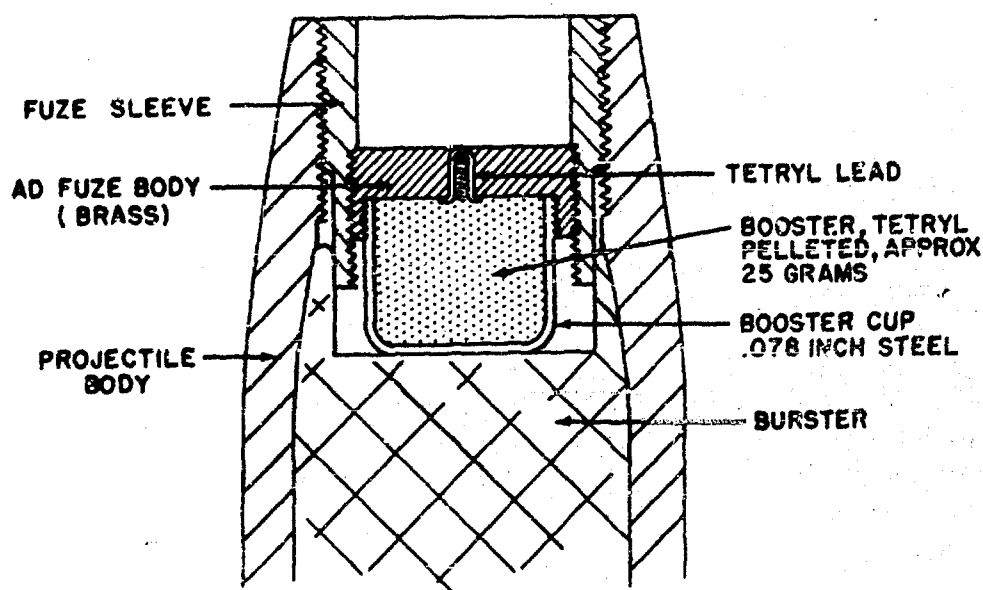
Booster Assembly for Auxiliary Detonating Fuze Mk 44.
